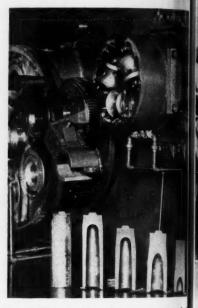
The drawing dies are composed combination rollers and rings. Below the dring die are shown, right to left, the billet are leaving the first punch, after leaving the wond punch, after finish piercing and are drawing. An unsectioned shell forging is the extreme left. Note the chute in back of drawing dies from which finished forging drop onto a conveyor to cool.
